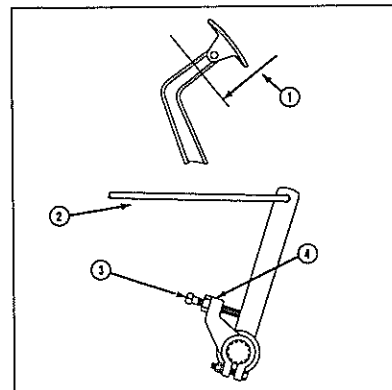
ADJUSTING CLUTCH PEDAL
